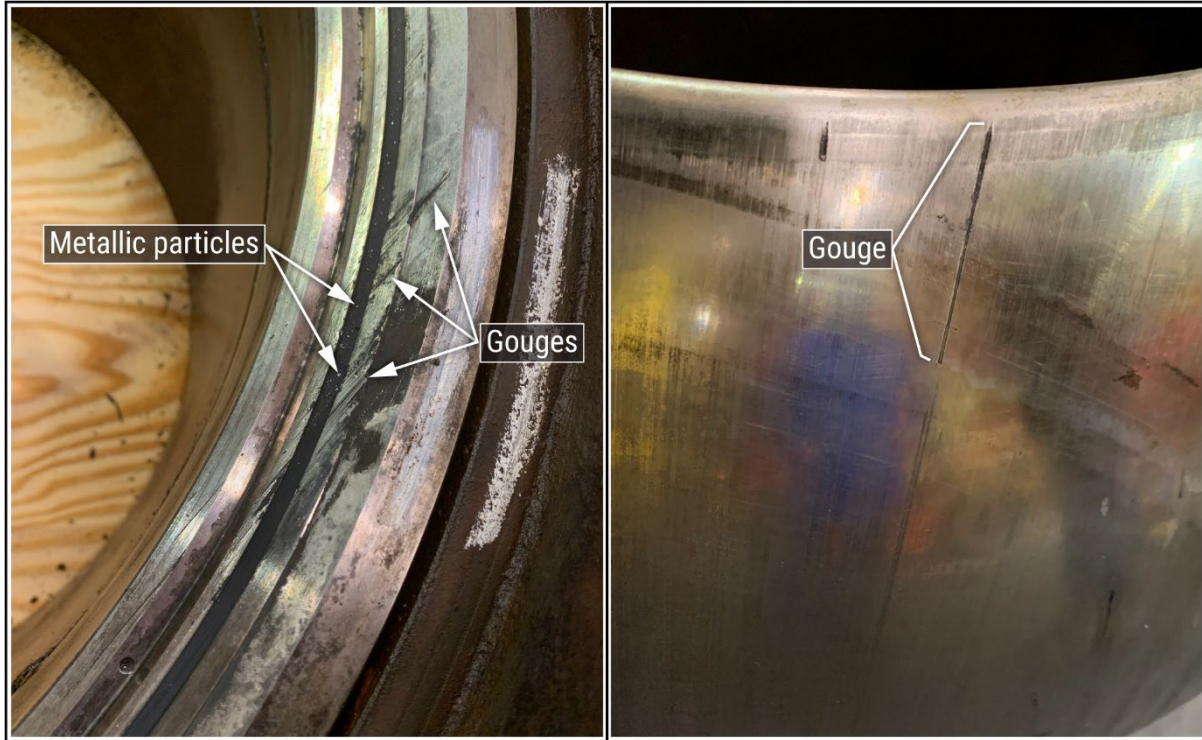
Damaged mainline valve sealing surfaces visible after disassembly into ring (left) and ball (right) components.
